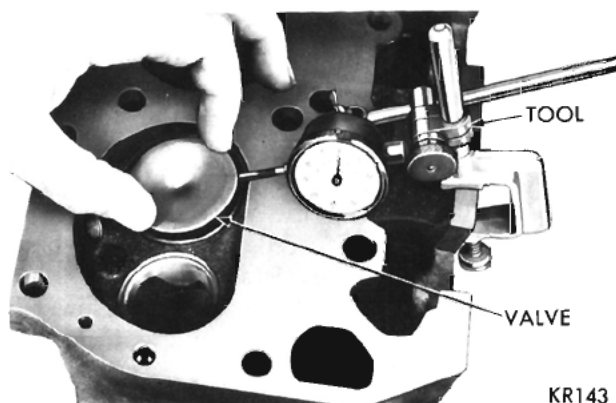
Measuring Guide Wear Using Tool C-3339 (Typical)
